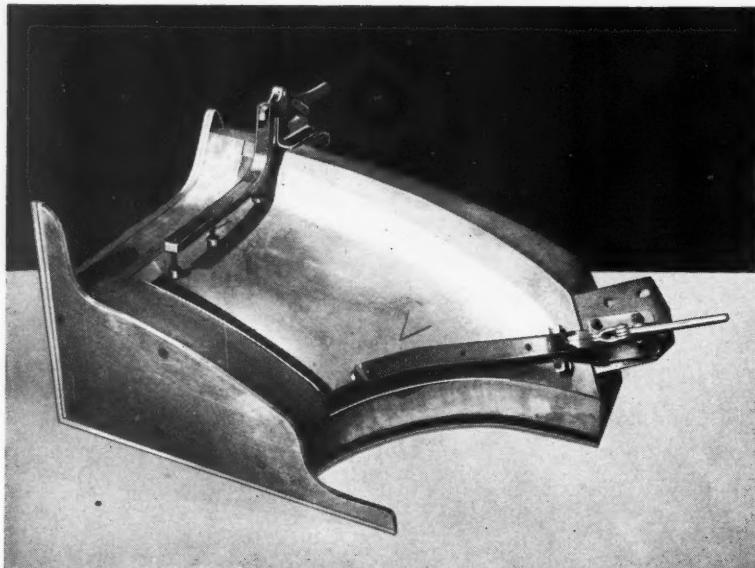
Plastic saw fixture for a fairing skin. Trimming operations can be performed on three sides of a part by rotating the fixture to the proper position
